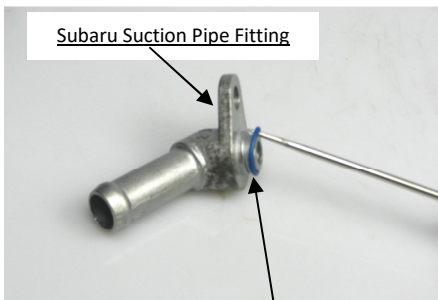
New O-Ring installed onto fitting with small amount of grease on O-Ring for installation to pump housing.
